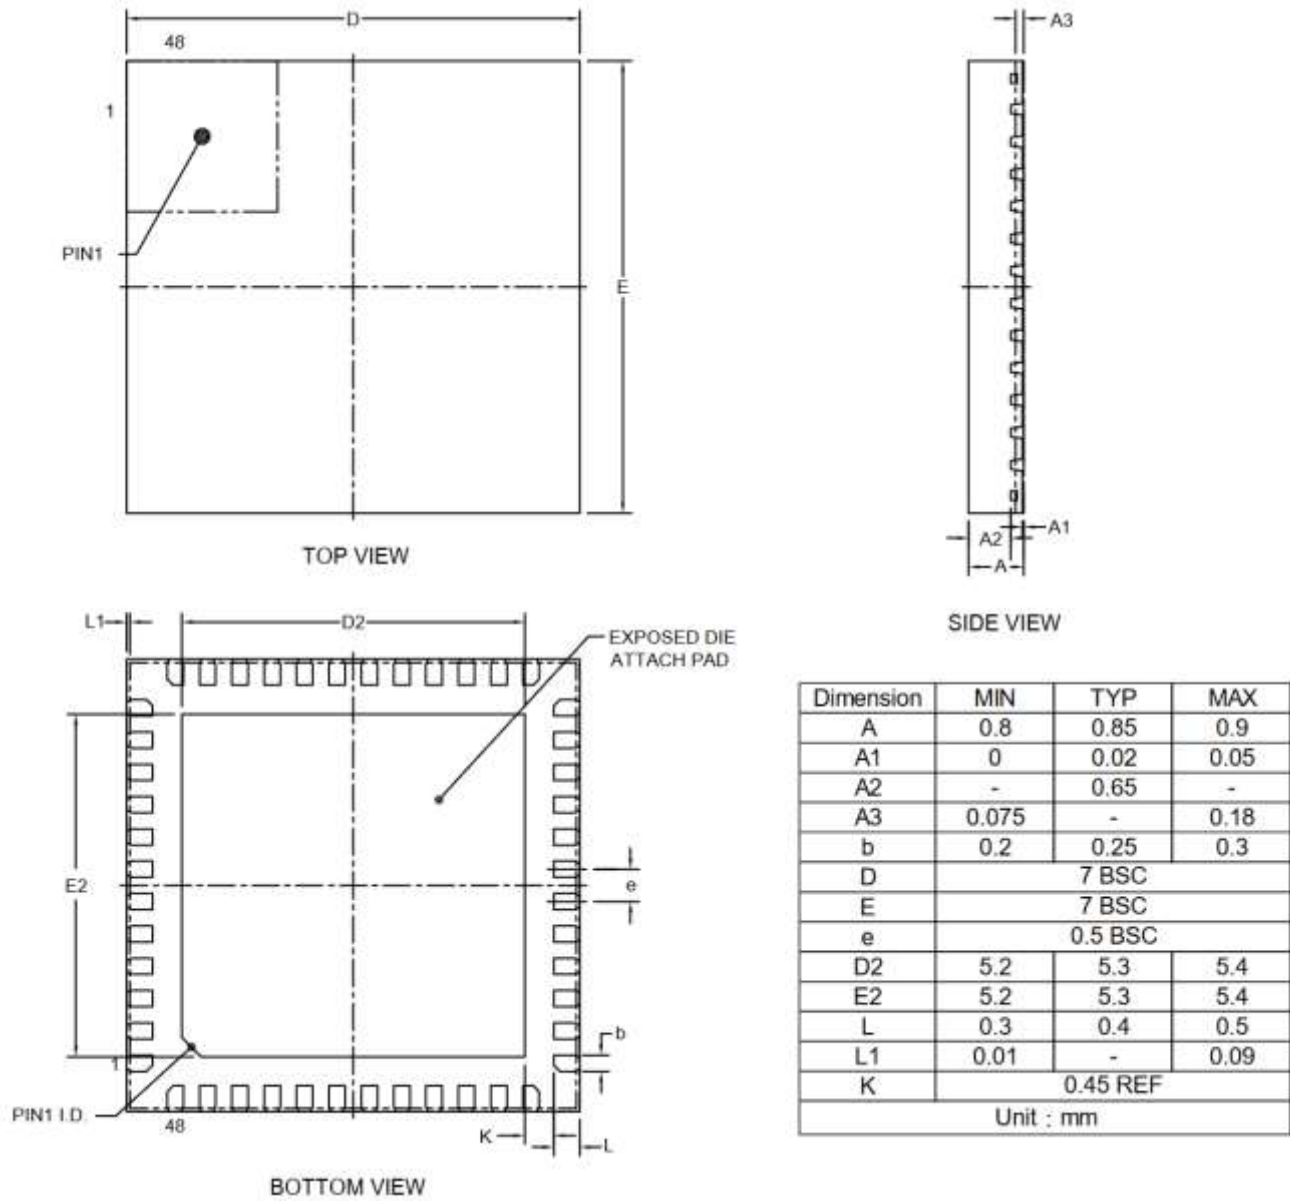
QFN7X7-48 WS Package Outline Dimensions
